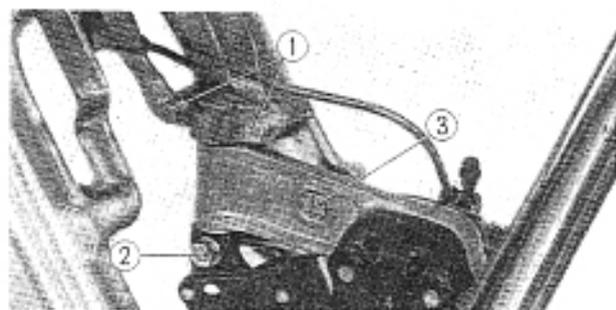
① 6 mm bolts ③ Caliper adjusting bolt
